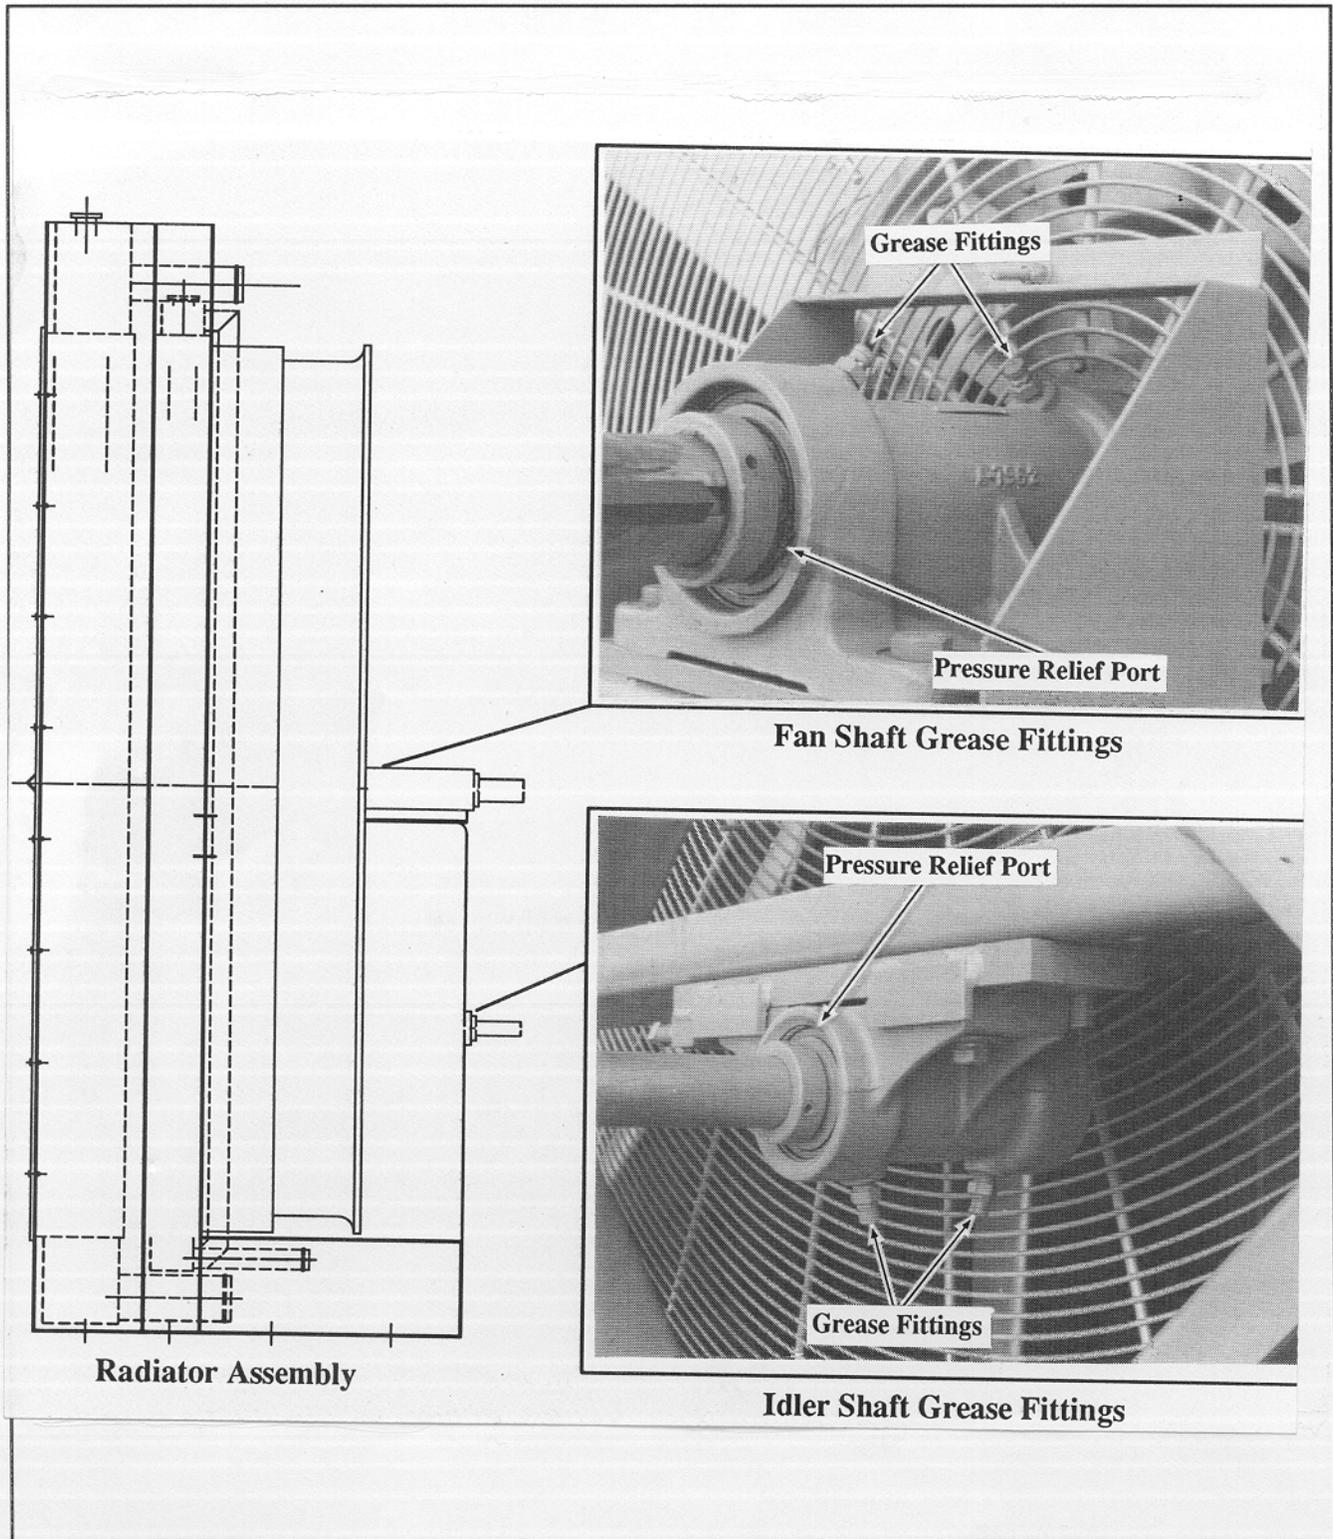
Radiator Fan Bearings and Pressure Relief Ports
